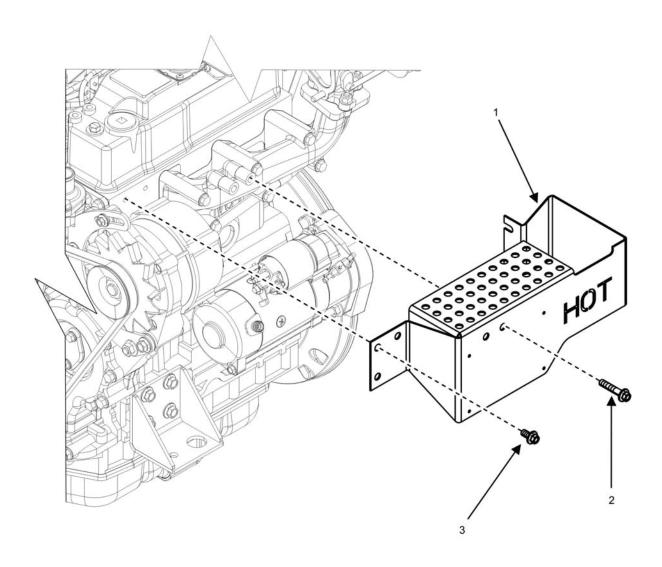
Exhaust Manifold (Sheet 1 of 2).
